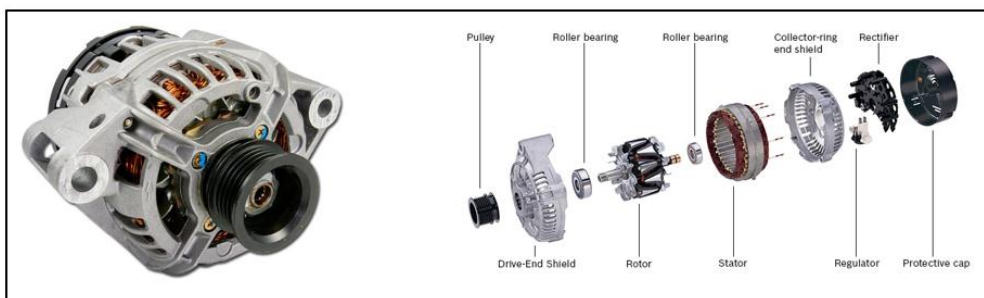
Alternator, with exploded view (Source: Bosch Automotive Parts)
